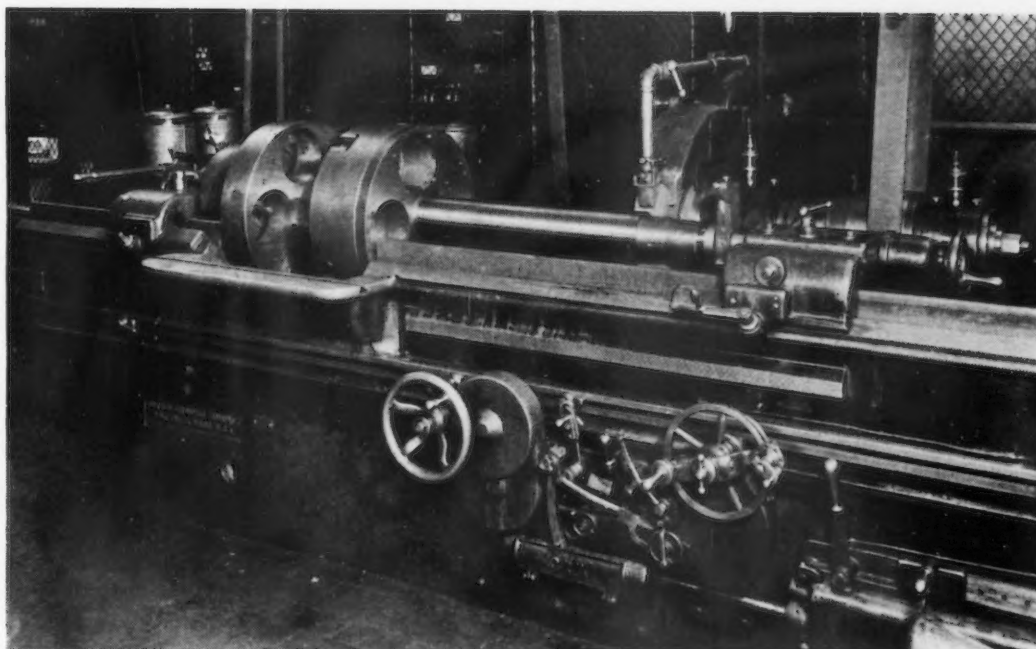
Grinding plays a large part in finishing the tool slide and spindle components. These constitute the "heart" of the automatic.
